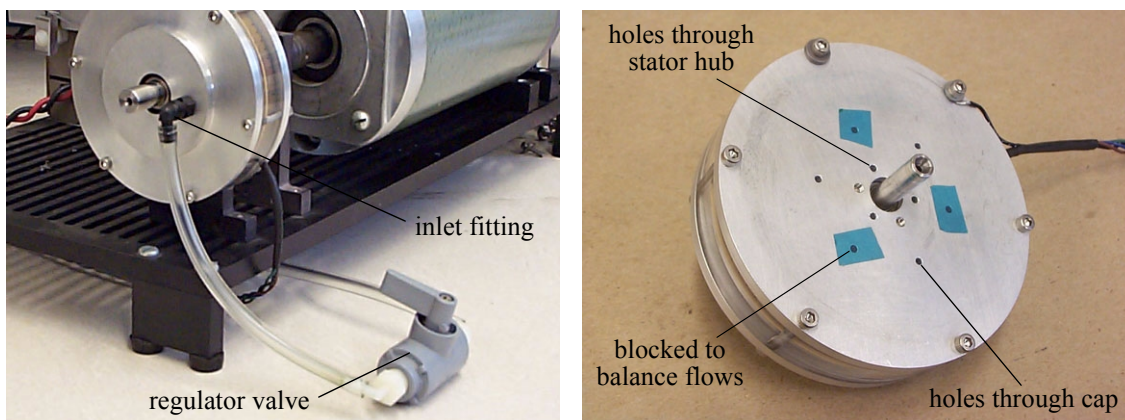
Implementation of air cooling for the one-sided prototype. The regulator valve and inlet fitting are shown on the left. Exit hole placement is shown on the right.
